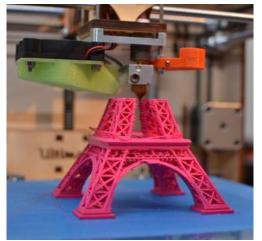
Half-complete 3D printout of Eiffel Tower model
